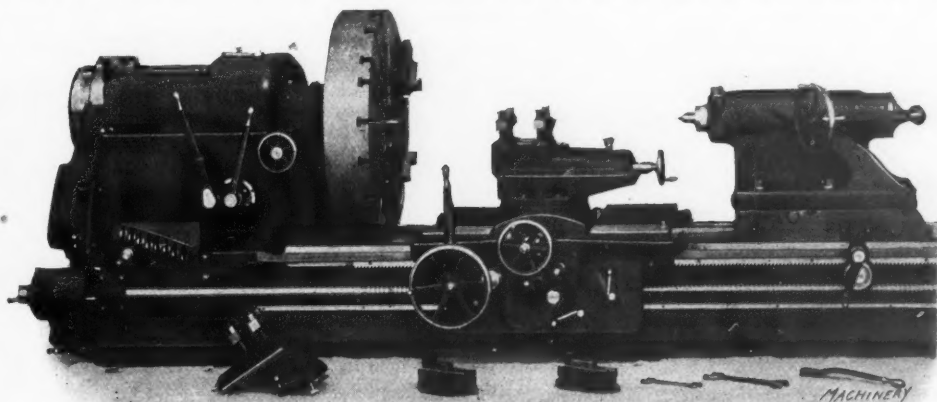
Lodge & Shipley 48-inch Selective Head Lathe
